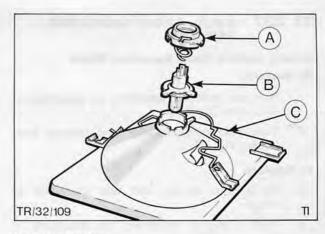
A – Retainer B – Bulb C – Headlamp unit
